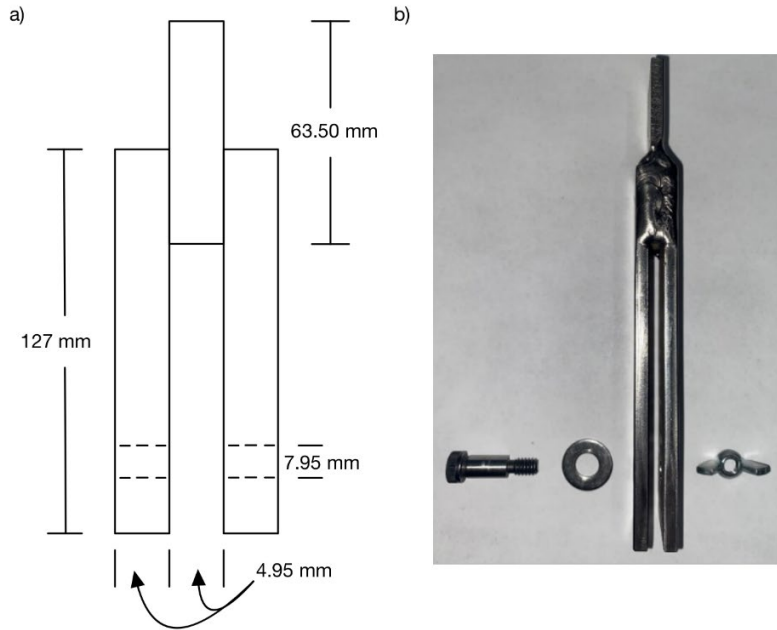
Steel adapter used to simulate bolted joint loading: a) adapter schematic and b) actual adapter with shoulder bolt
